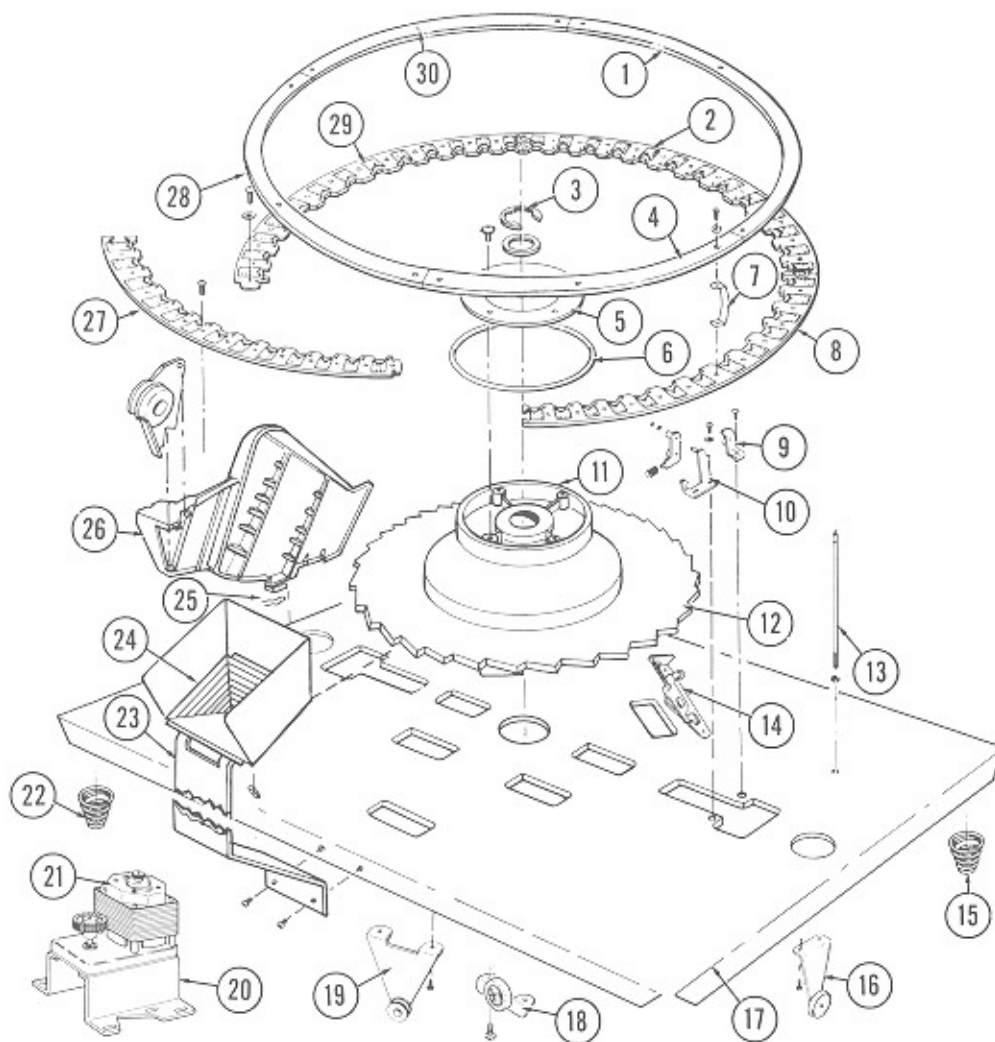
RECORD CARRIER AND CHASSIS MOUNTING PLATE - 2810
